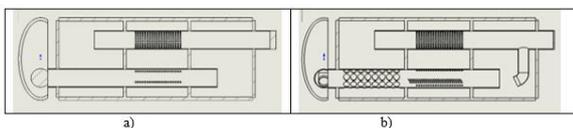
Technical views of exhaust mufflers; a) Simple design, b) Complex design
